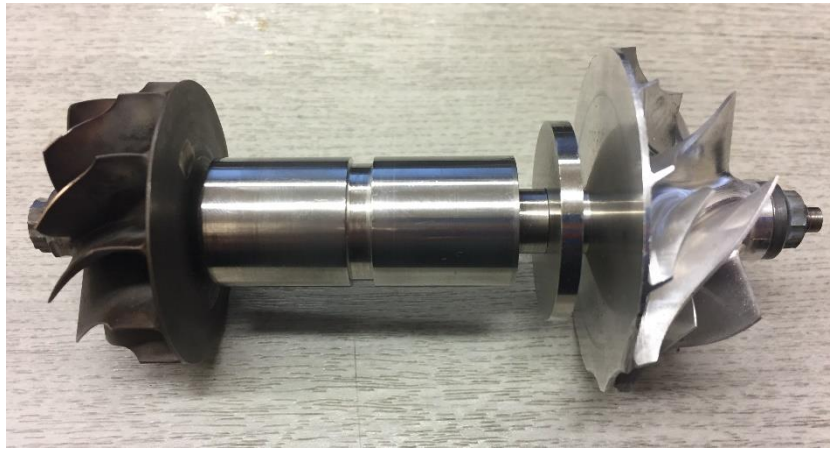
A rotor to be supported by the proposed hybrid air bearings
